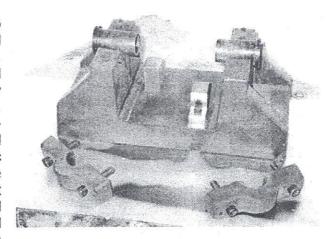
The fixture with bushings, clamps and stops to position crank throws.
